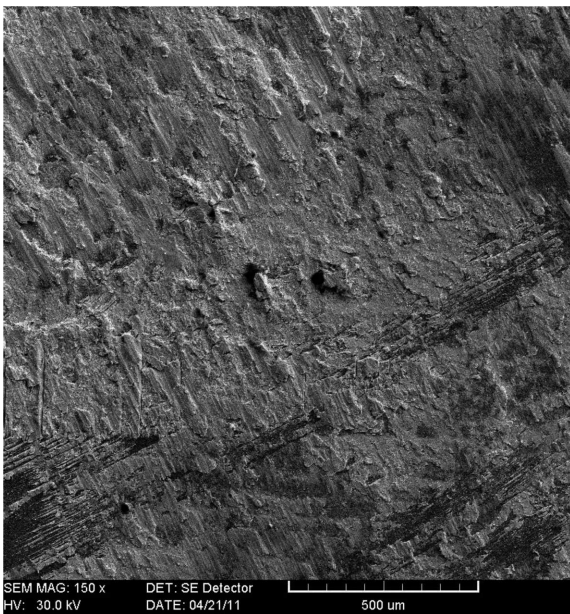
Fractured surface of Bi-11Ag solder on Cu substrate
